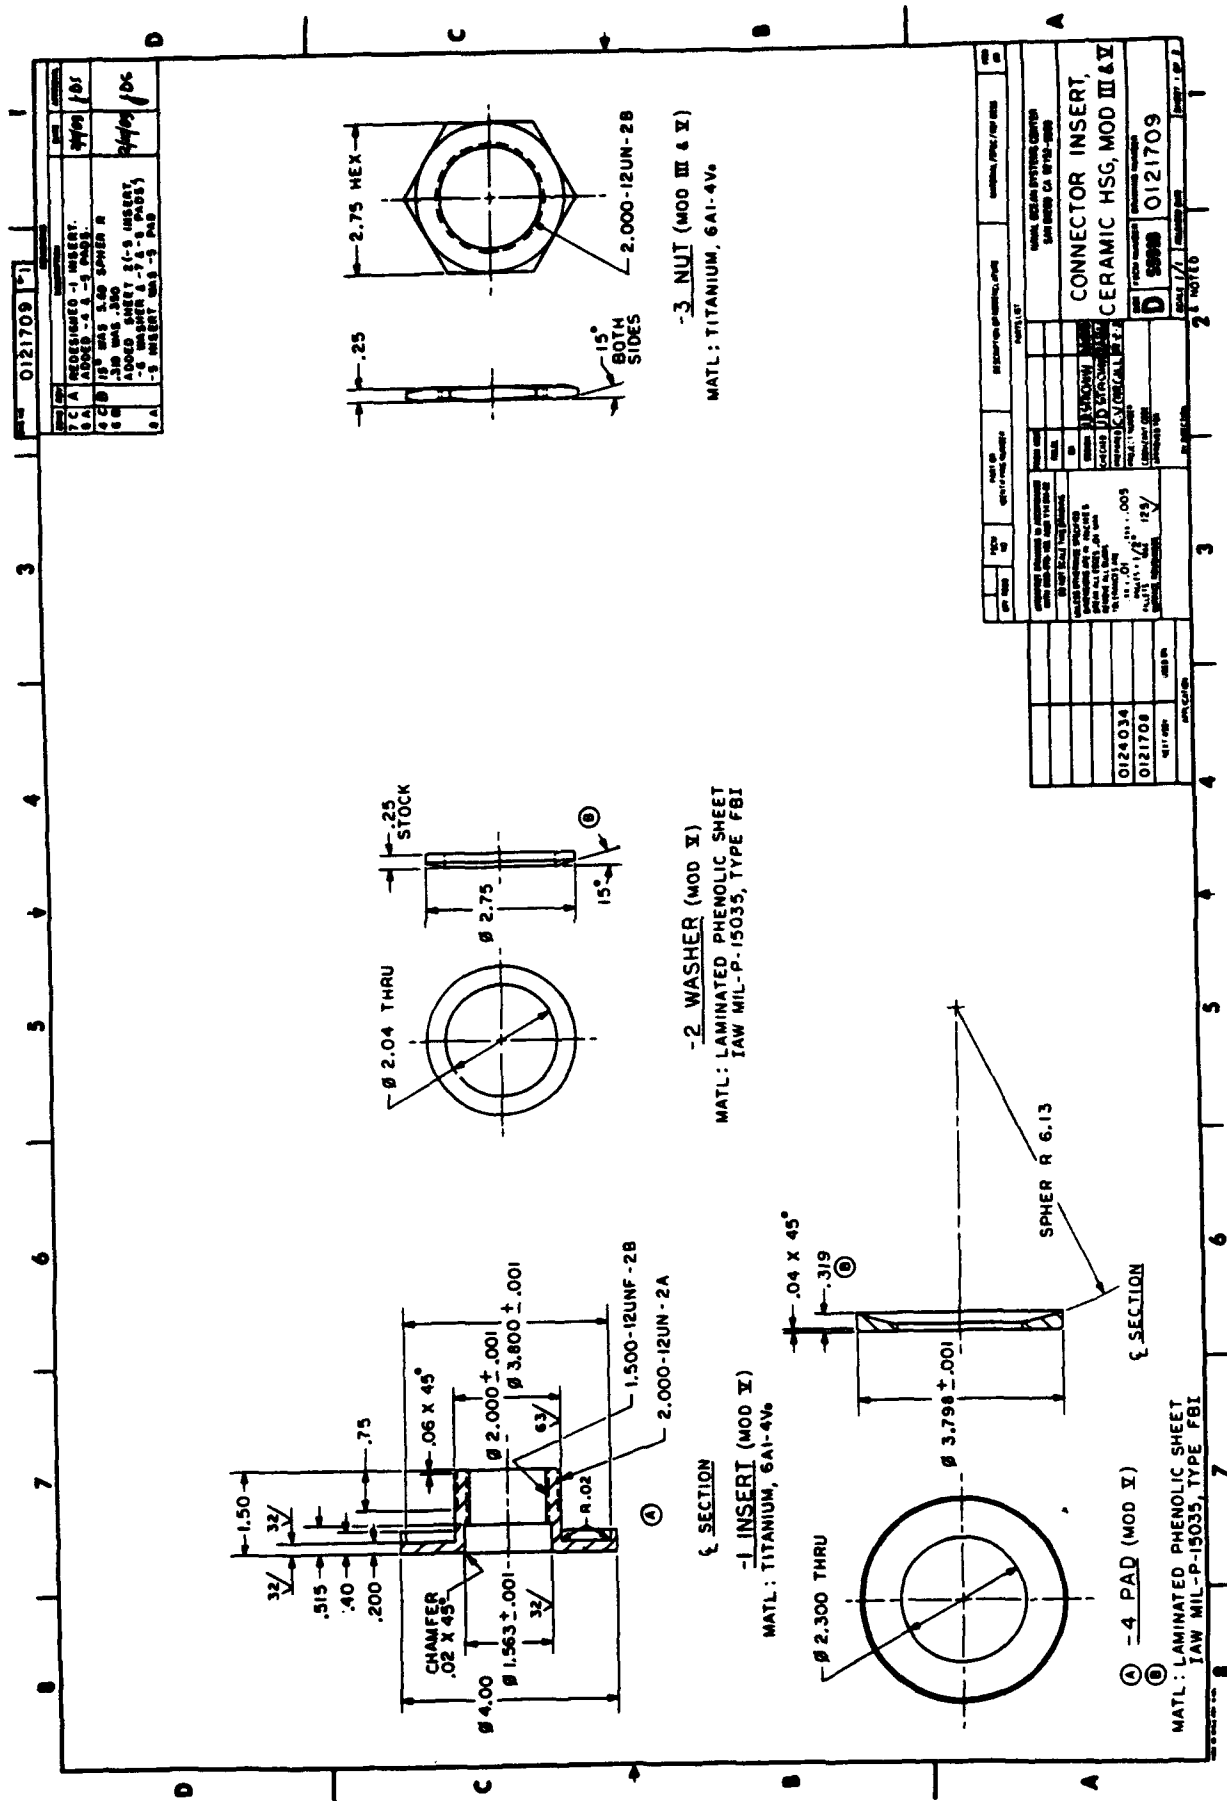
Connector insert for Mod 3 hemisphere incorporating phenolic bearing pads, Sheet 1.
